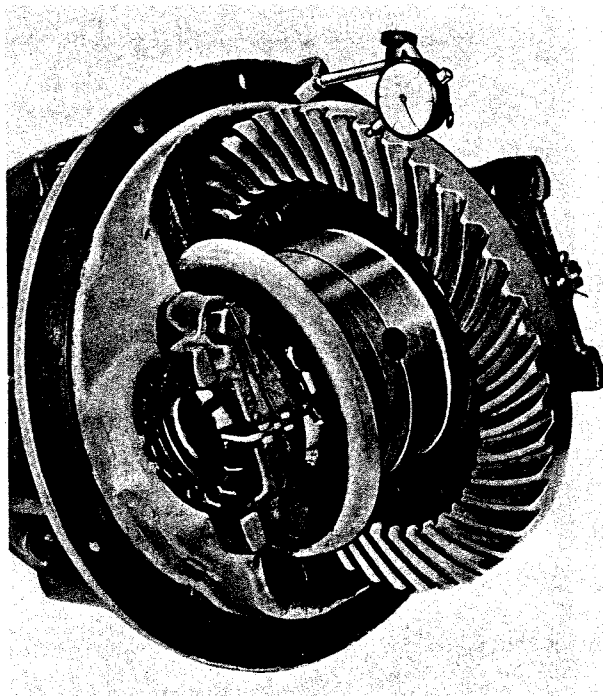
Measuring Ring Gear Backlash with Dial Indicator.
